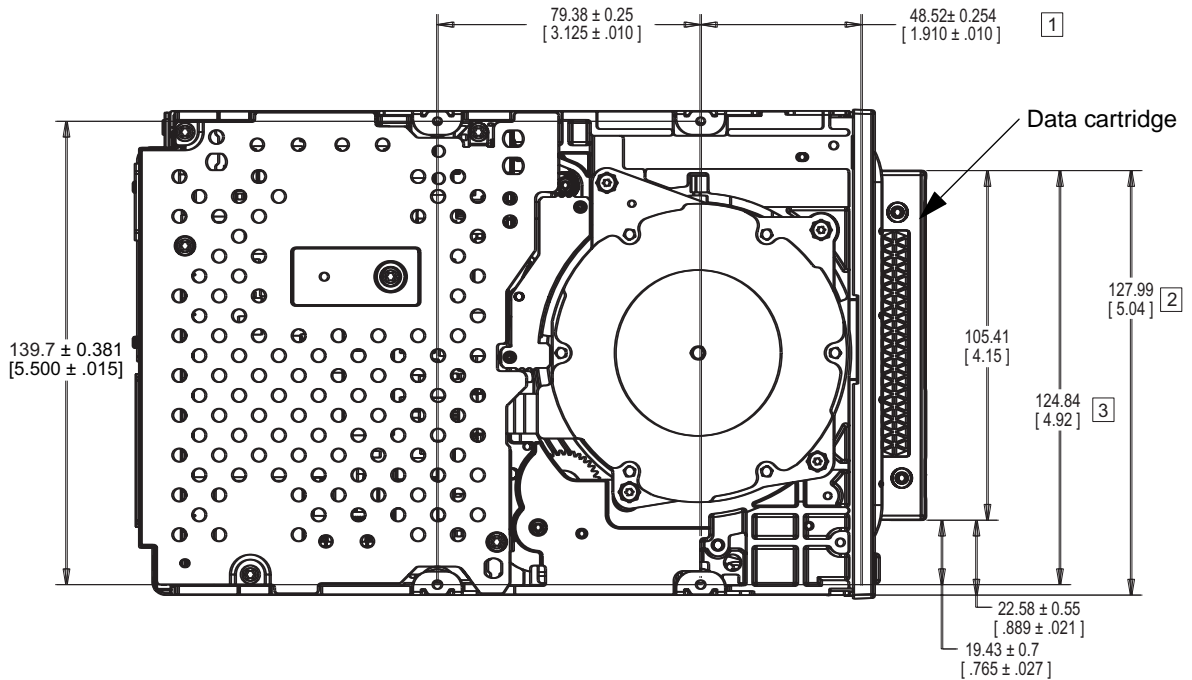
Internal Tape Drive Mounting Hole Dimensions (Bottom View)
